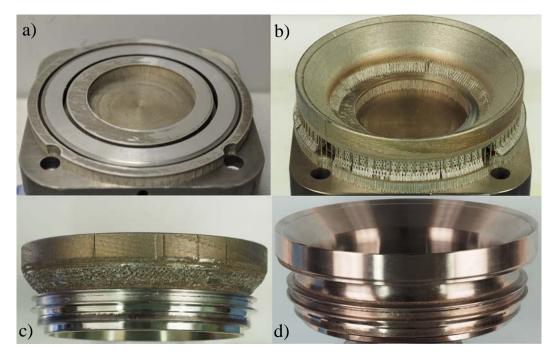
The seat ring manufacturing process at different stages: a) sawn piece placed on the machined printing platform, b) printed seat ring, c) support structures separated, d) the finished piece.
